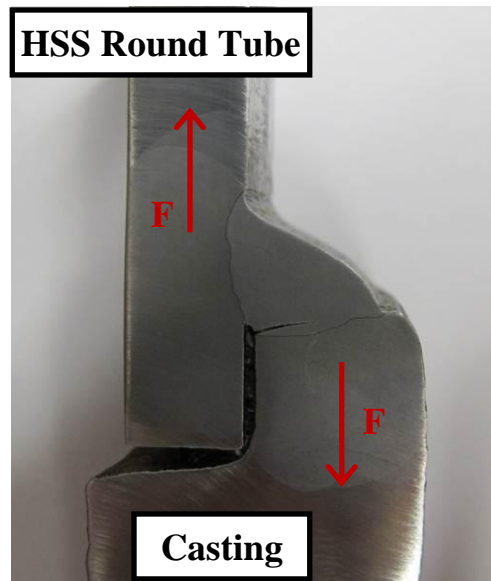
Eccentric Nature of Fillet Weld
